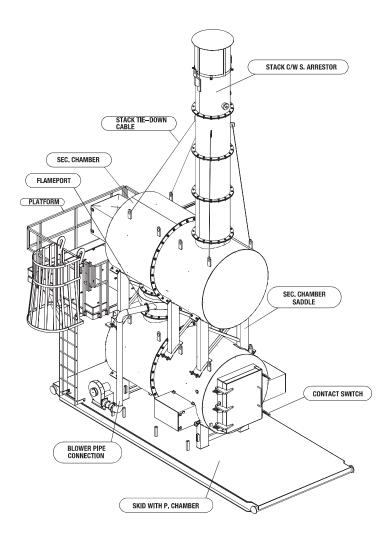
OVERALL VIEW SHOWING THE SECTIONS
